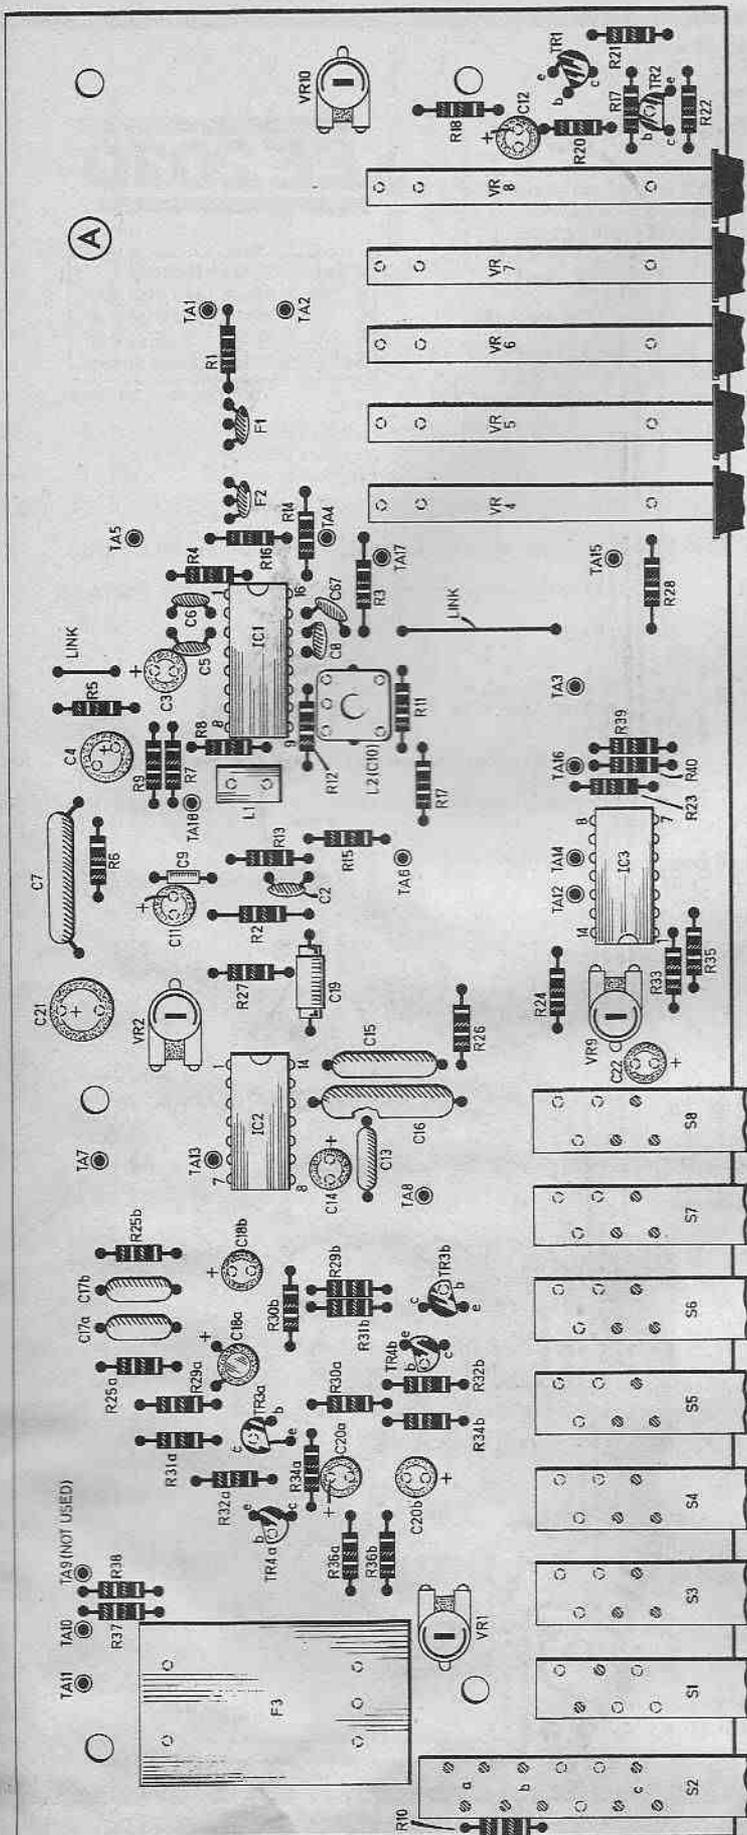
Board A of the 2020 Tuner Amplifier: top view showing components in position.
